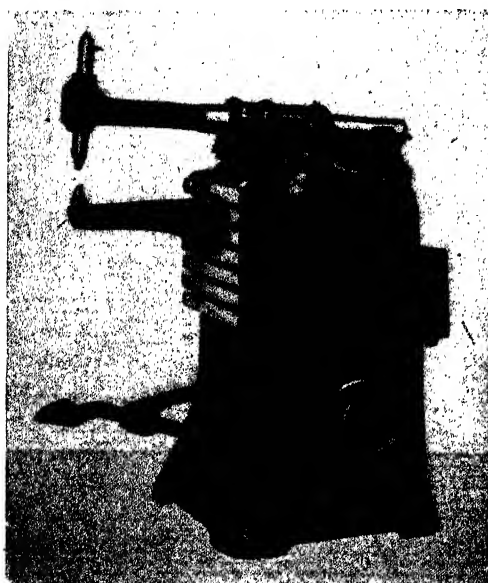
Spot-welding machine of the normal type of construction
